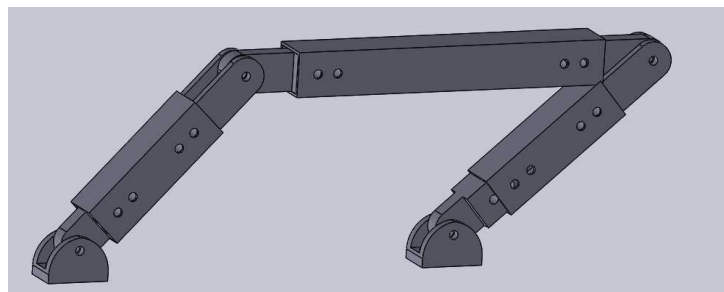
Initial 4-bar Mechanism Design with Actual Parts
